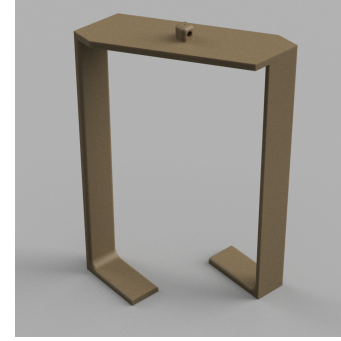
CAD rendering of the 3D printed test stand used to suspend the torsional pendulum.
